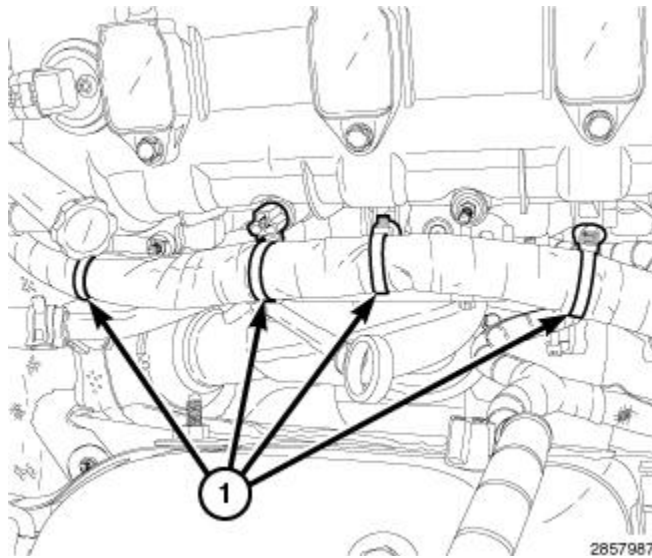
Main Wire Harness Retainers At Right Cylinder Head Cover
